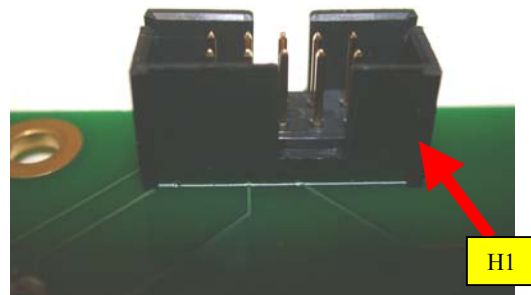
Solder H1 (P/N 21-21-0016) to the Footswitch PCB (P/N 35-00-0173-4).
